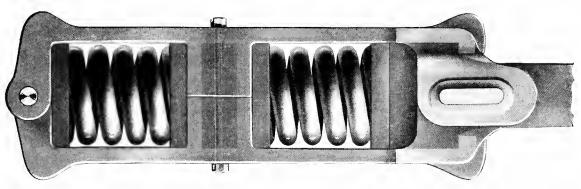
Murray Keyoke for Use with Tandem Spring Draft Gear. Keyoke Railway Equipment Company.
